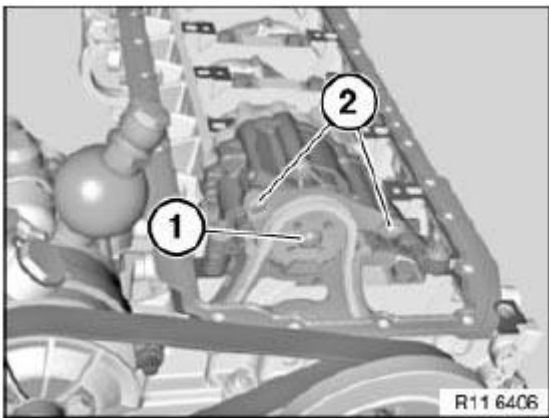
Identifying Oil Pump Housing Bolt And Screws
